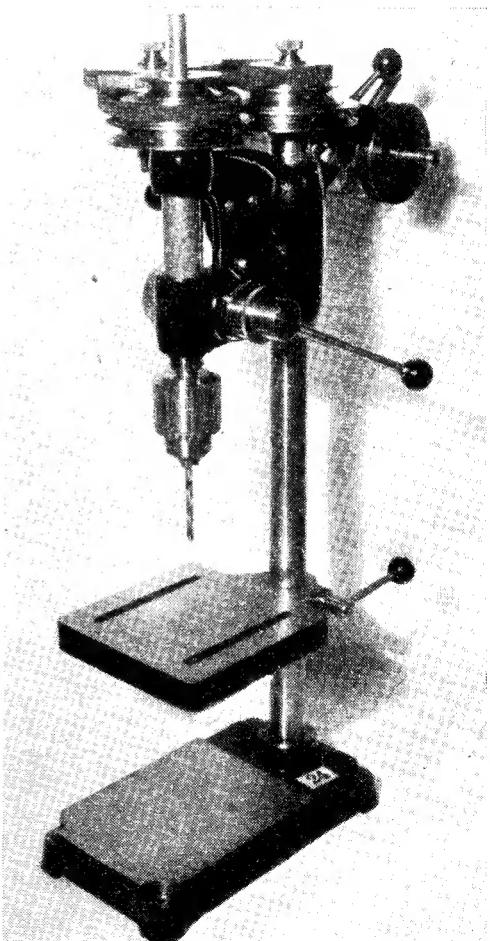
A Cowell 3-in. drilling-machine, equipped with "back-gear," and built by Mr. J. Nichols. A feature of this machine was the excellent finish of the cast-iron parts
